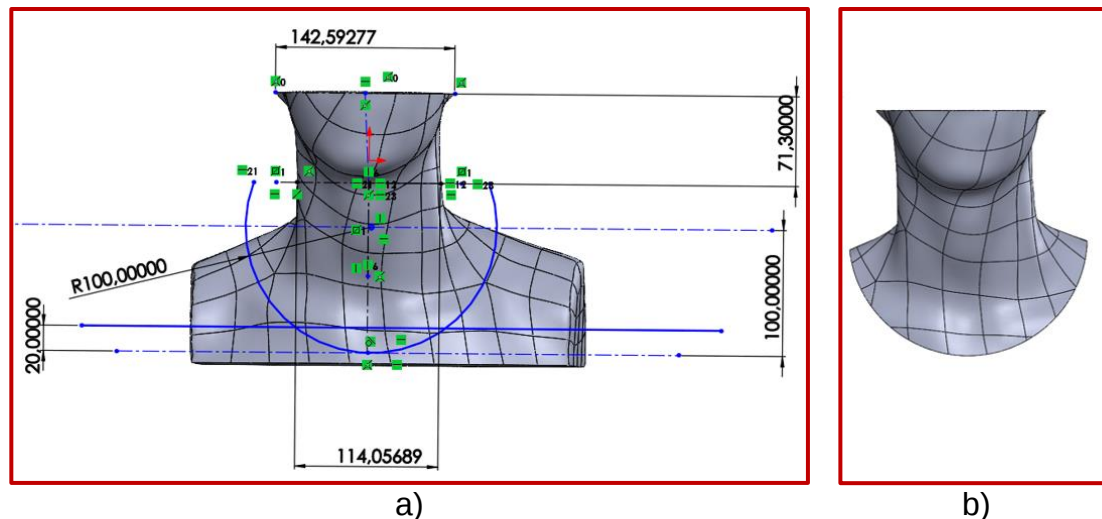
Double Figure of the Sketch Scheme for the Cutting in the Frontal View with the dimensions of the volunteer A: a) Sketch and Dimensions of the volunteer A; b) Final cut of in the Frontal View.
